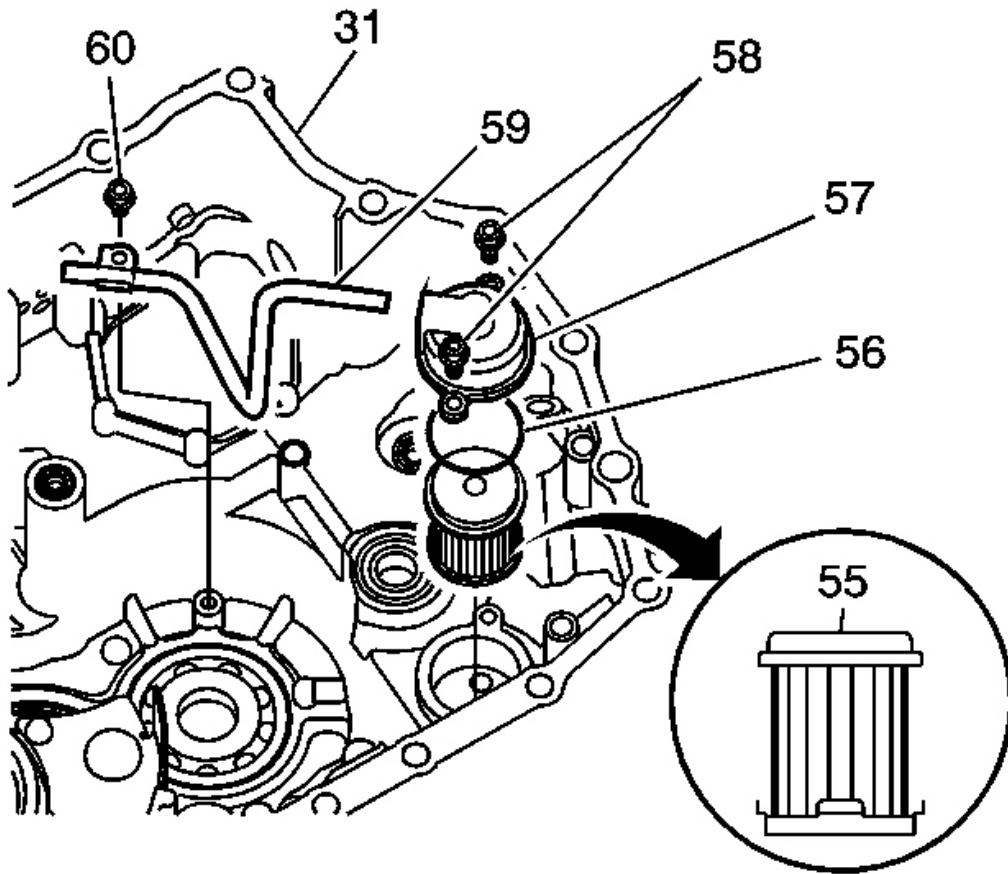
Lube Fluid Pipe, Bolt, O-Ring Seal & Fluid Filter Cover
